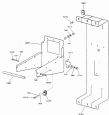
IDENTIFICATION BLIND FOR ANALYSIS (MATERIAL: STEEL; FINISH: ZINC PLATE)
